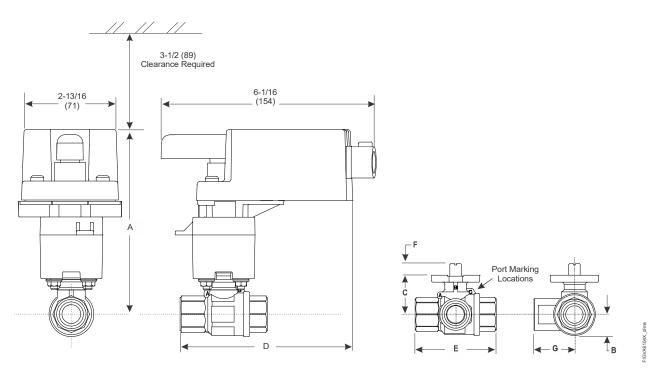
Field-installed VA9104 Series Electric Actuator dimensions with optional M9000-561 Thermal Barrier dimensions, in. (mm)
